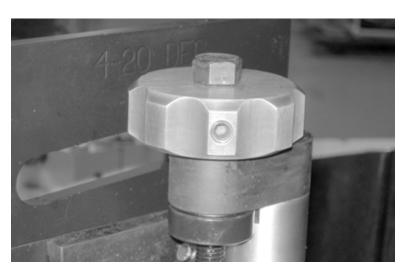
To engage the axial feed knob, screw the knob down all the way over the axial feed bushing and tighten the set screws into the groove in the bushing. This attaches the knob to the bushing and allows the knob to drive the axial feed up and down.
